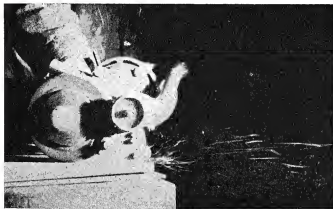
Grinding steel with extractor head and spark gap fitted and operating.
